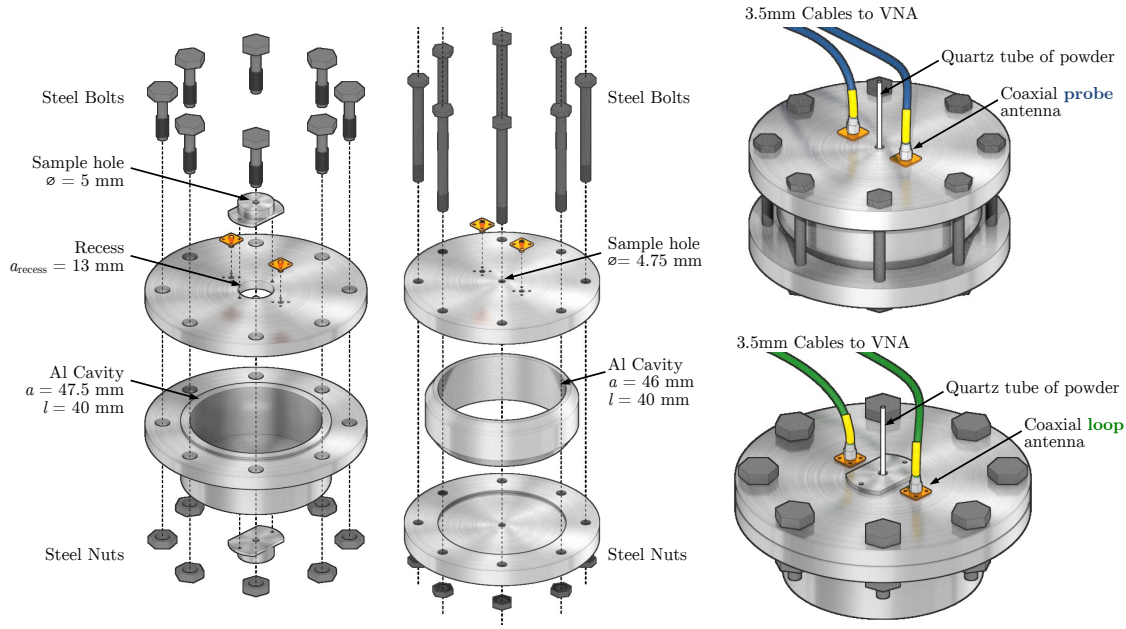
Exploded views of the Cyl- $\mu$  and Cyl- $\varepsilon$  (left), and 3D view of cavity set-up (right).
